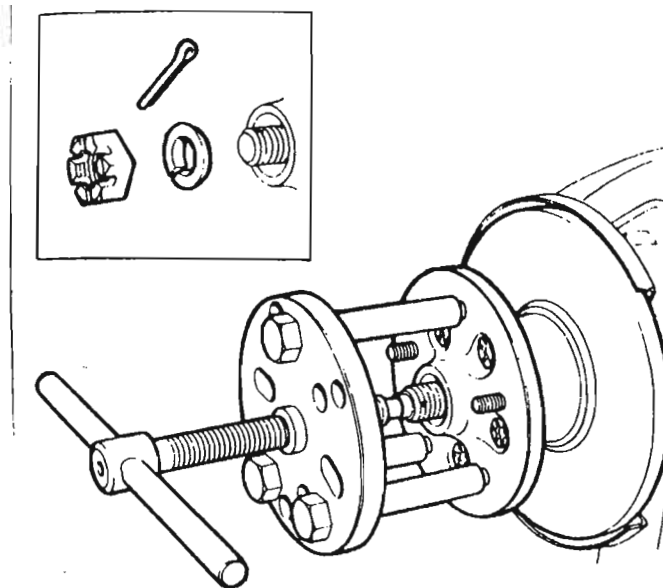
Using a puller to remove the hub assembly when replacing disc
